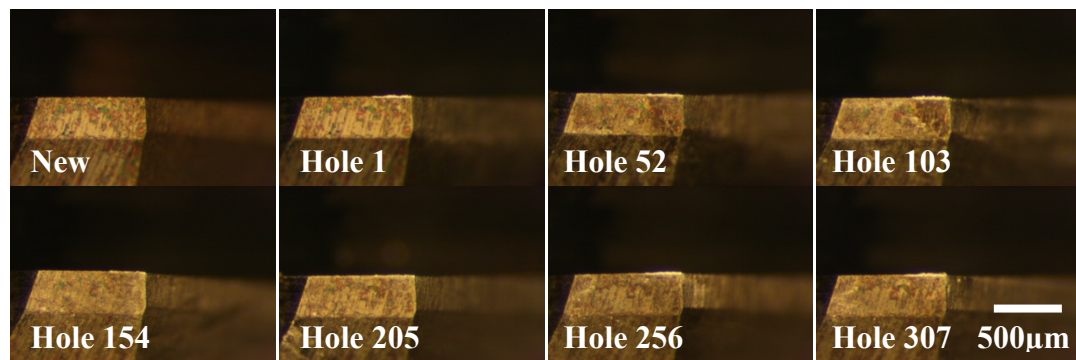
Tool wear micrographs of Dymon-iC reamer under 70bar through-hole cutting fluid, 32m/min cutting speed (Test 5)
